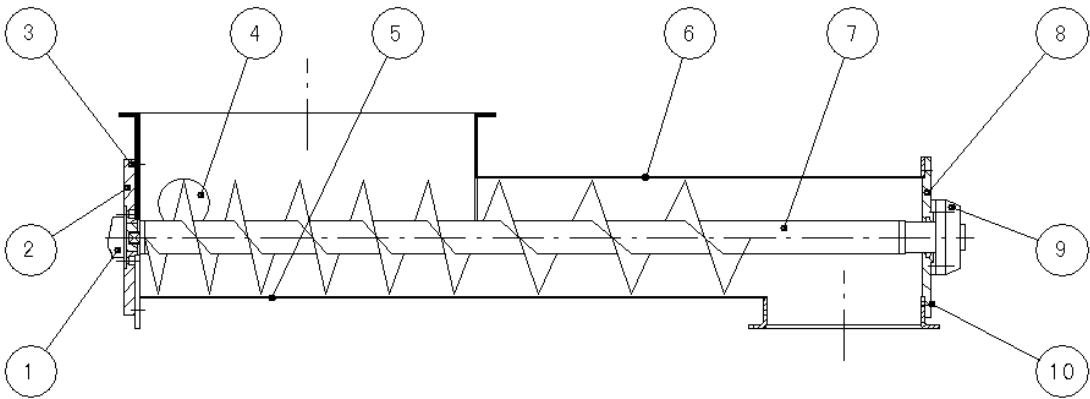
FEEDING SYSTEM OF SZLH508 PELLET MILL
